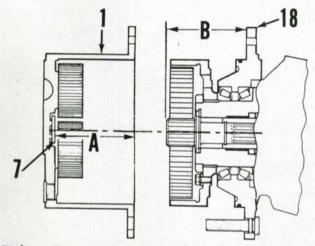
Thrust washer (7) controls axle shaft end play. To adjust, measure dimensions "A" and "B" and refer to text.
